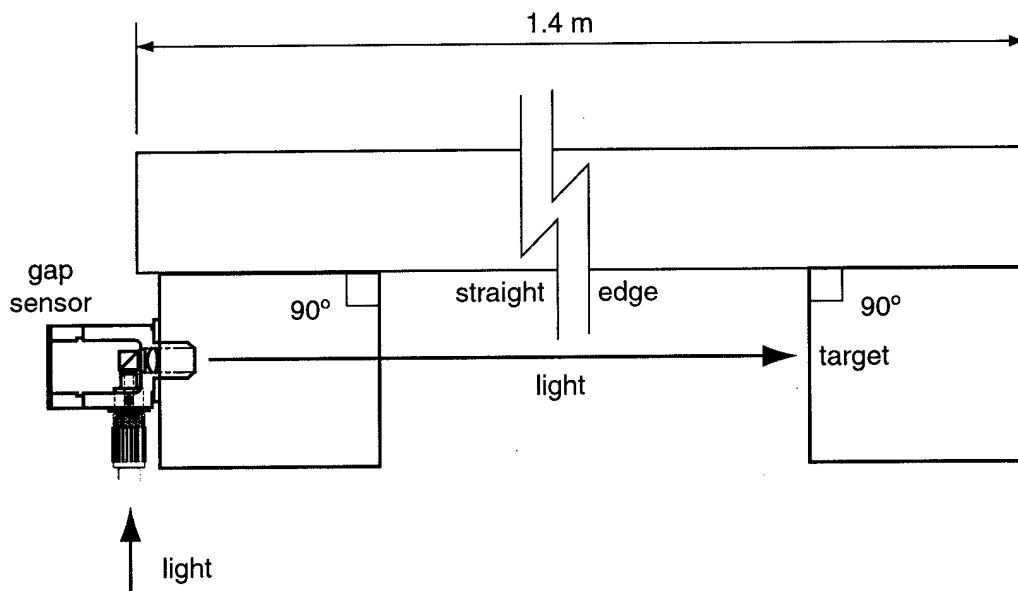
Drawing of beamsplitter cube alignment fixture.
